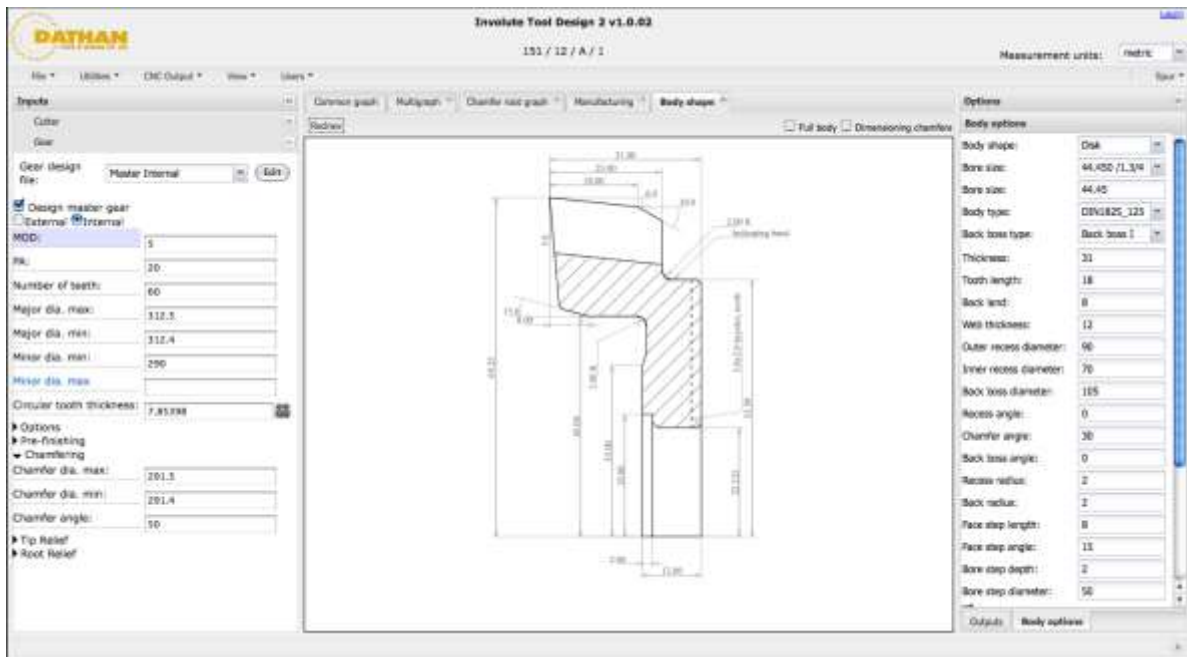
Web-based CAD/CAM system for gear shaper cutters
